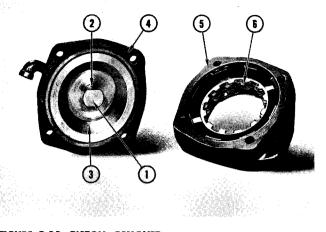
PISTON, REMOVED 1. Piston Guide 3. Piston 5. Body 2. Spring 4. Cover 6. Discs
